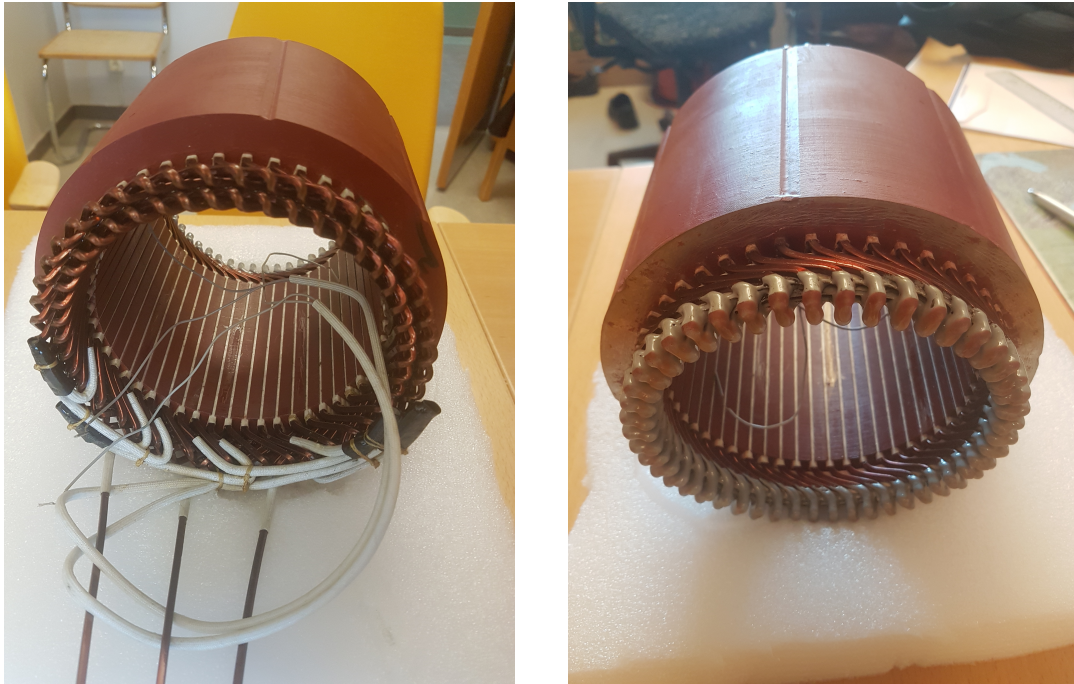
Fully assembled hairpin stator from Chalmers' hairpin machine, the topside is shown on the left together with external connections and bottom welded side on right.
